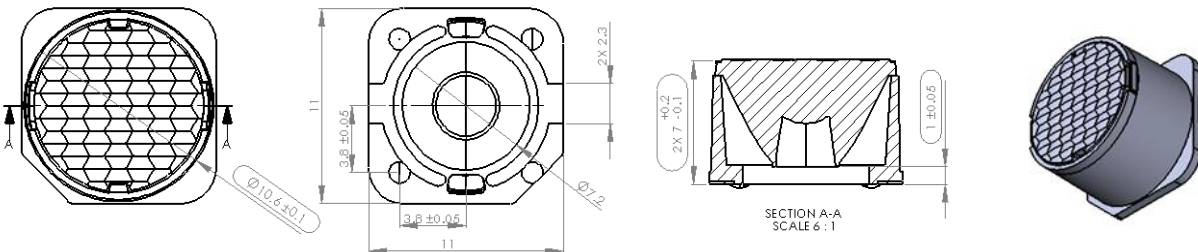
FLT Assembly - Top, Bottom, Section and Isometric views with dimensions
